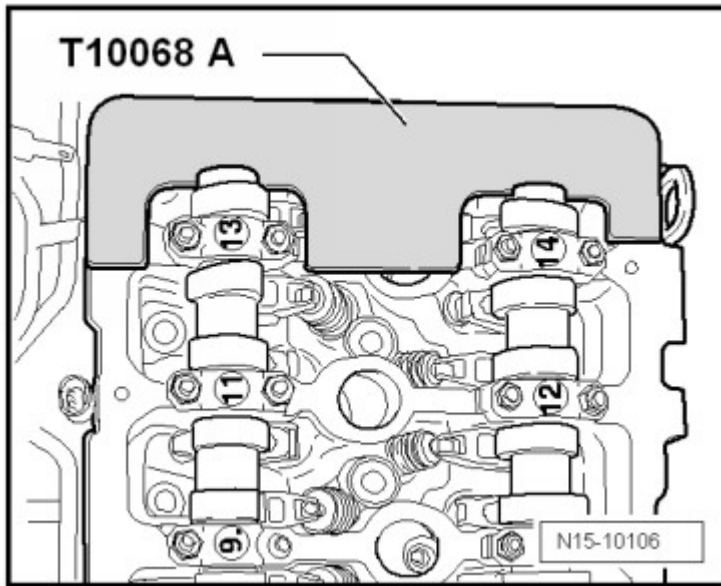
Identifying Camshaft Bar T10068 A Engage In Shaft Grooves
